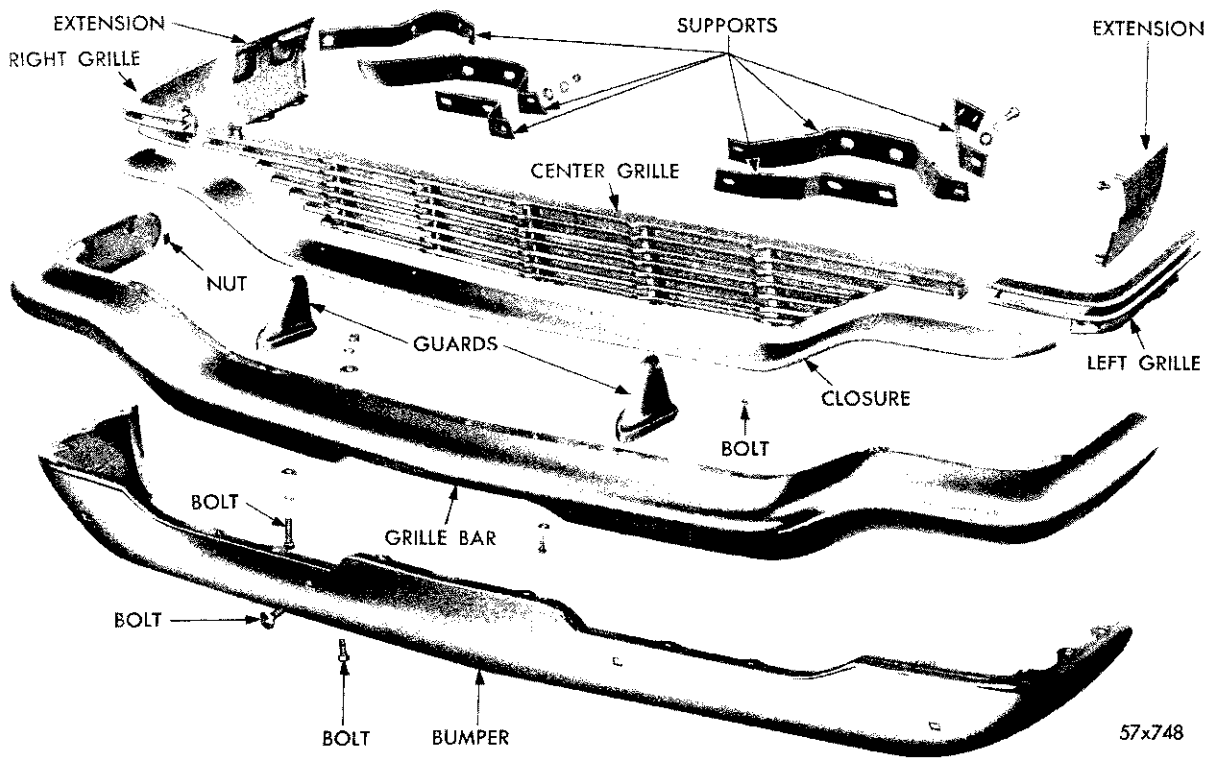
Bumper and Grill Assembly—C-75, C-76
